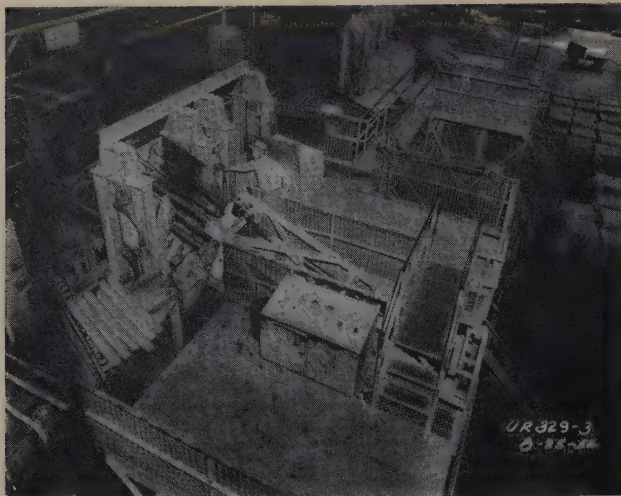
Charging machine illustrating method of charging cathodes and reject wirebars into the arc furnaces.
